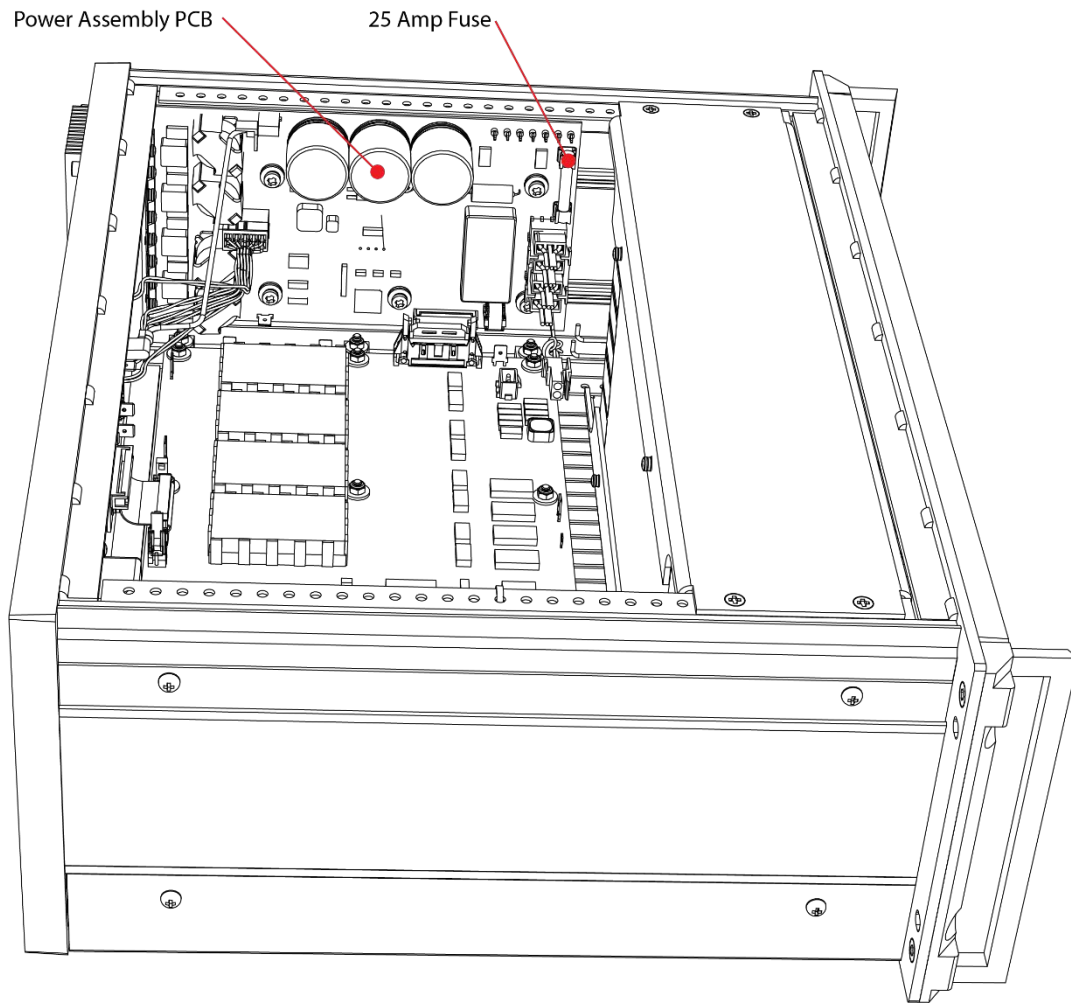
Electronic Chassis (Right View - Looking Toward the Power Assembly PCB)
